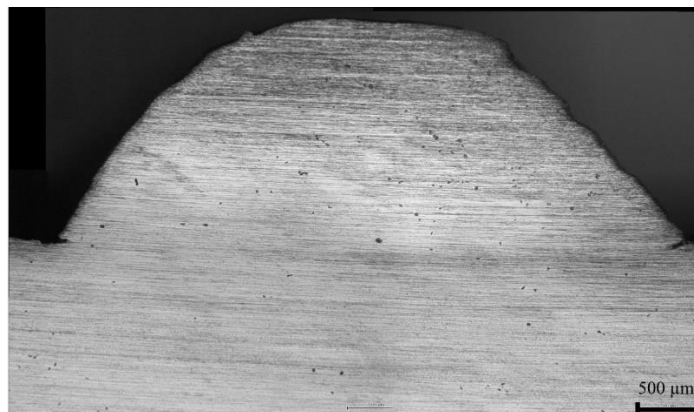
Macroscopic view of one welding bead.
